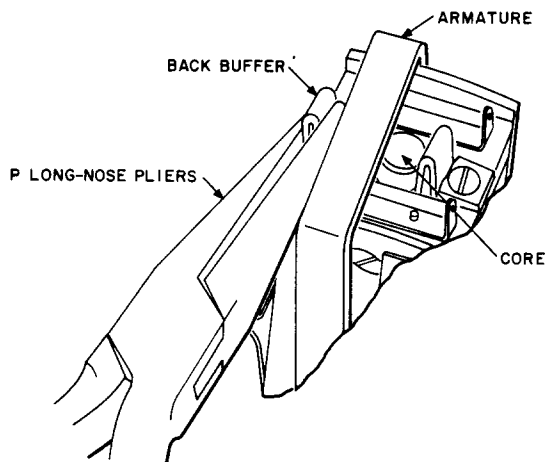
Method of Adjusting Armature Position (85F-Type Relay)
